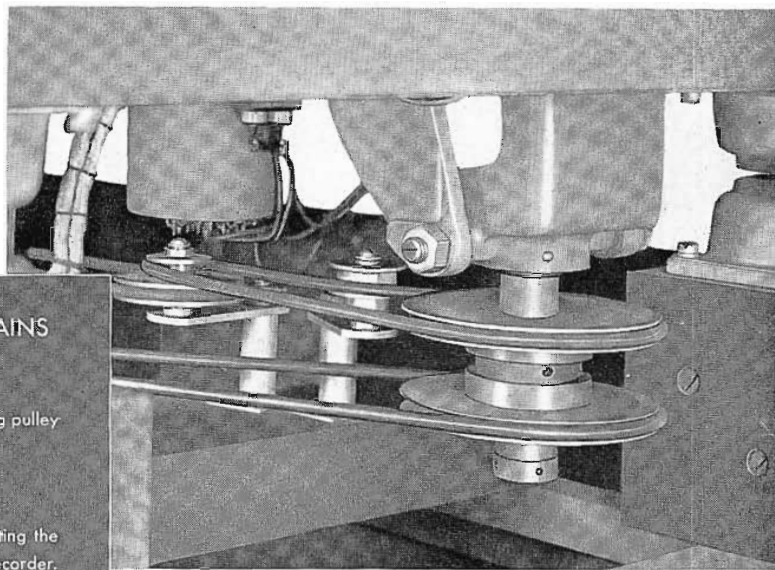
View of the fine groove kit completely installed in 73-B, Professional Recorder.
